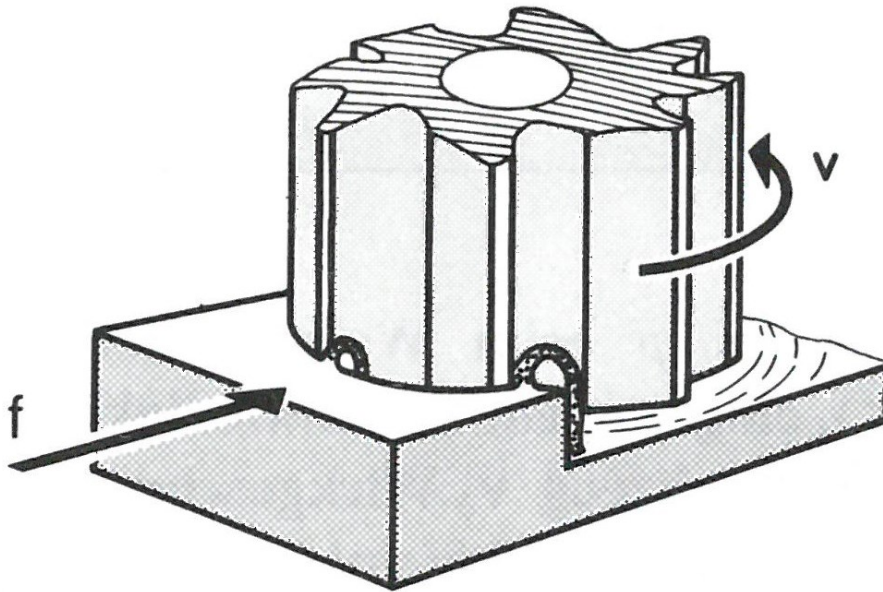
Scheme of a face milling arrangement, in which the milling tool is fixed perpendicular to the workpiece surface [23].
